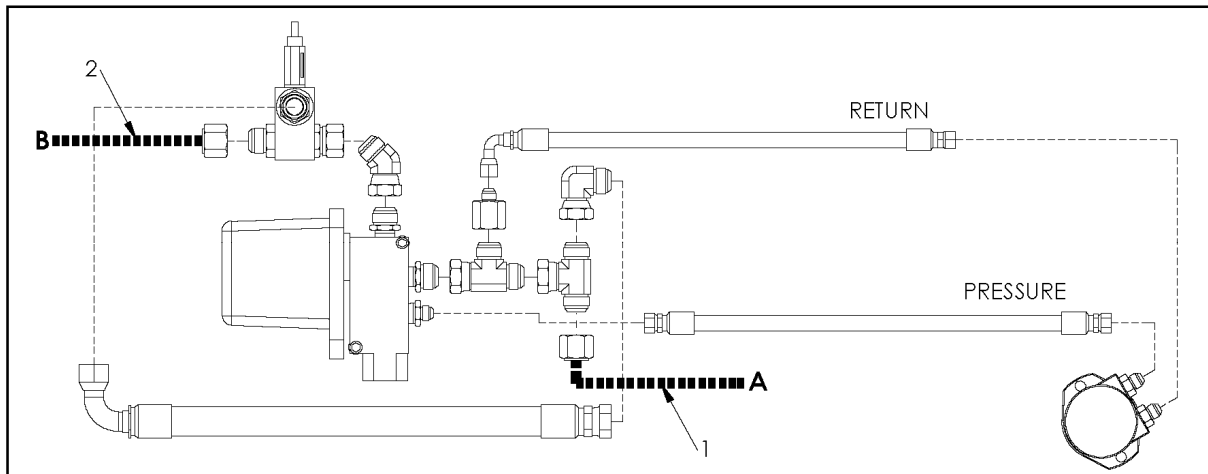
B – MICROBIN Hydraulics for Rear Valve System
